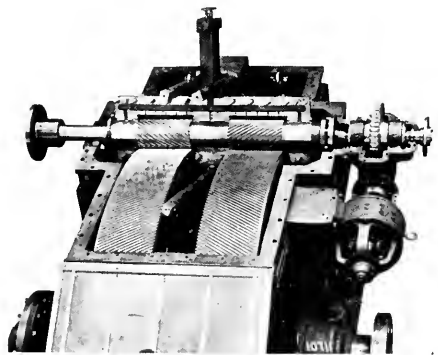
View of reduction gear with upper section removed showing pinion, gear, floating frame, lubricating oil channels and sprays and turning gear.
